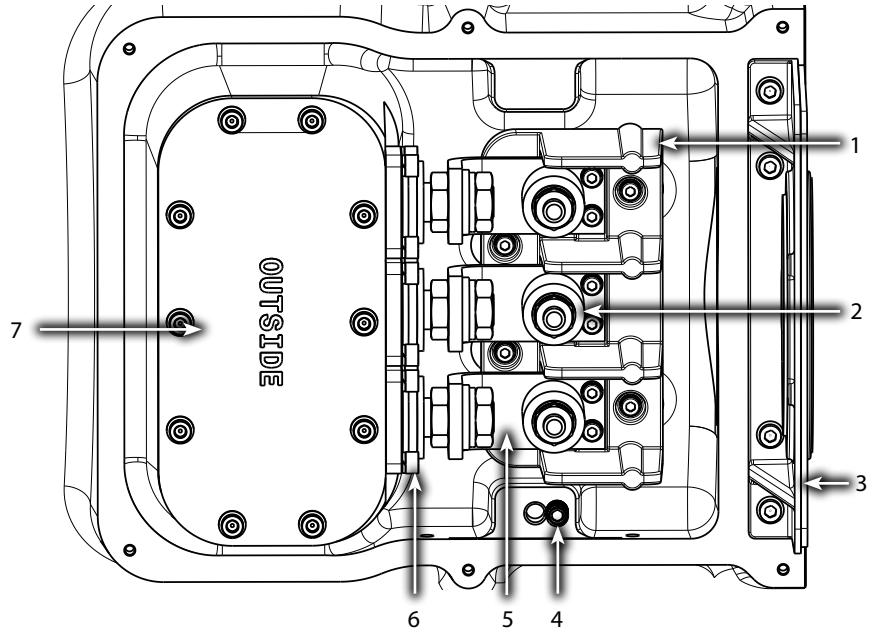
Compressor Component Identification – VTX Power Side (Cover Off)
